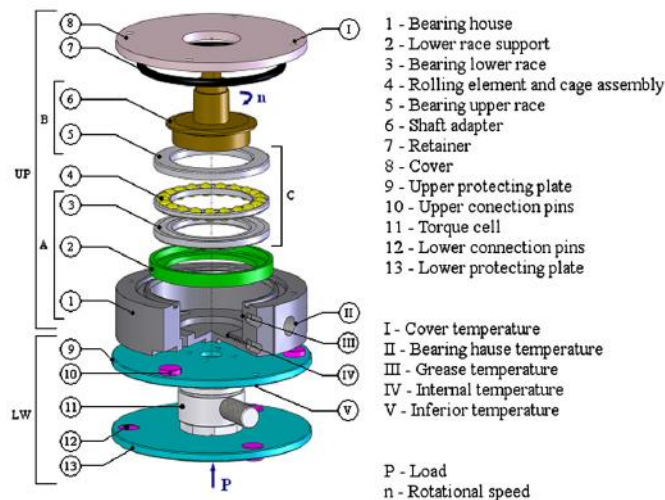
Schematic view of the rolling bearing assembly with torque cell [3]
